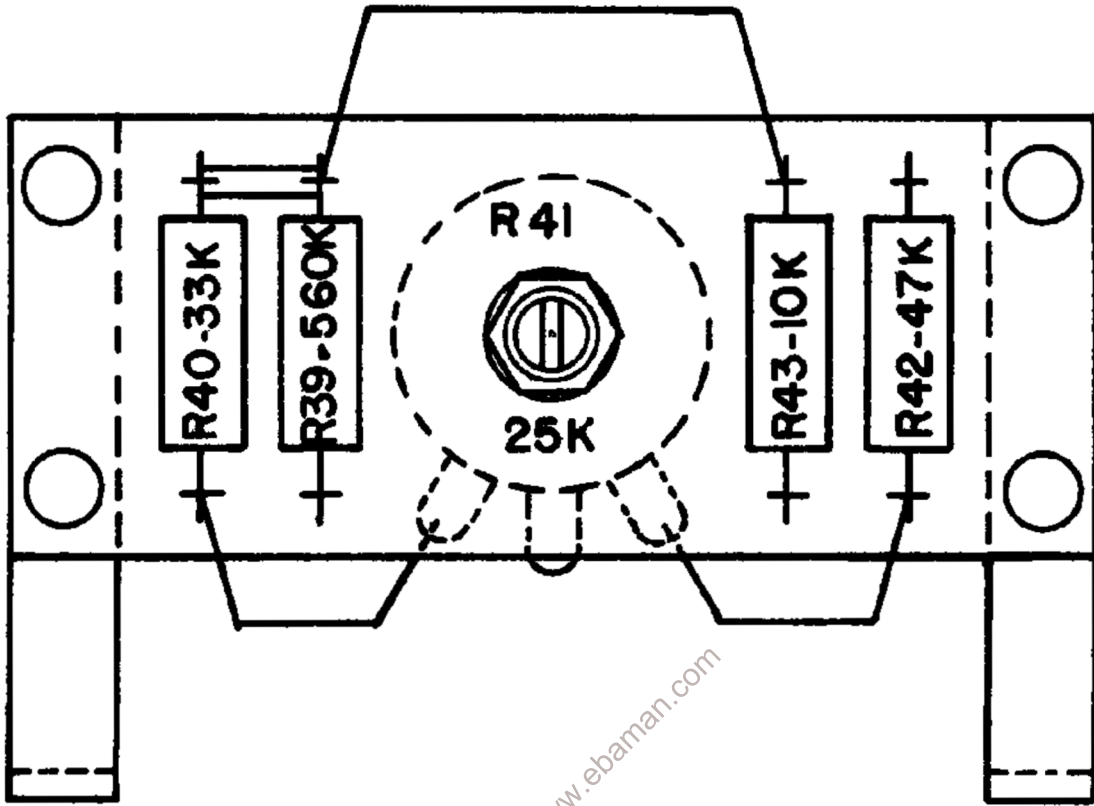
Model 200I Bottom View Bottom Plate Removed
